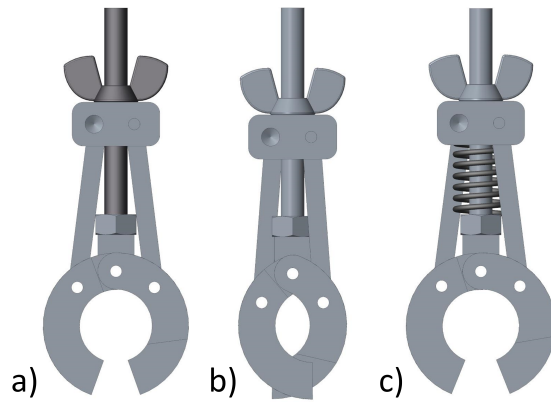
Pen holder mechanism. a) Dark grey part shows the adjustment mechanism depending on the pen size. b) The mechanism in closed position. c) The spring shown in dark grey is added for the mechanism to automatically open when pressure is released around the pen.
